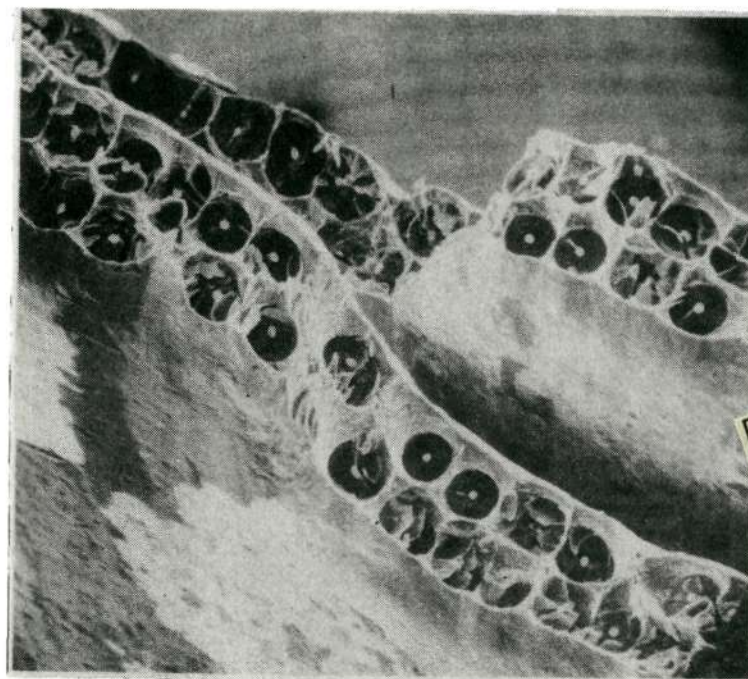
Fractograph of bilayer B-Al composite exhibiting axial fracture, 0.6 mil core diameter.
